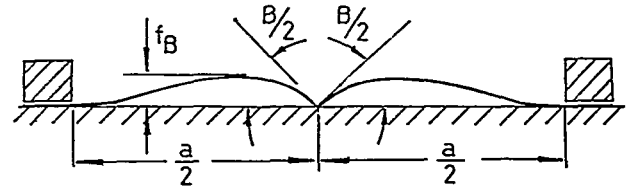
Geometry of Butt Welded Plates with Constrained Edges [5]
